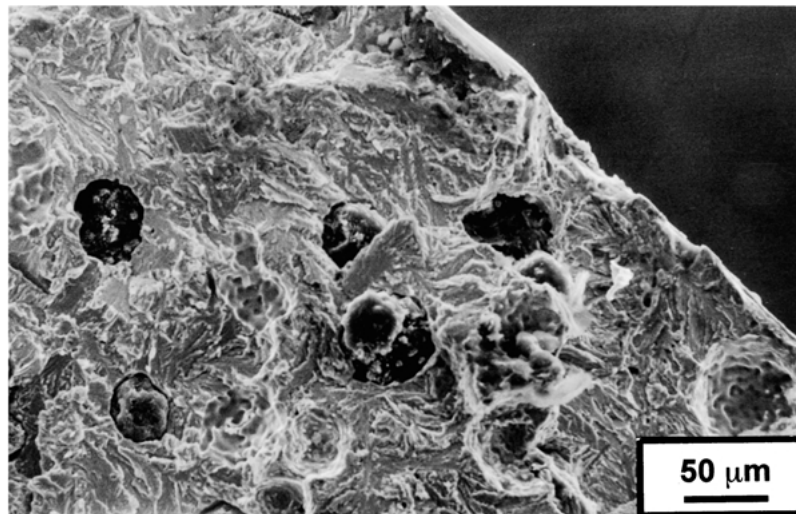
Fracture surface at the flat region pointed in Fig. 7, showing cleavage fracture.
